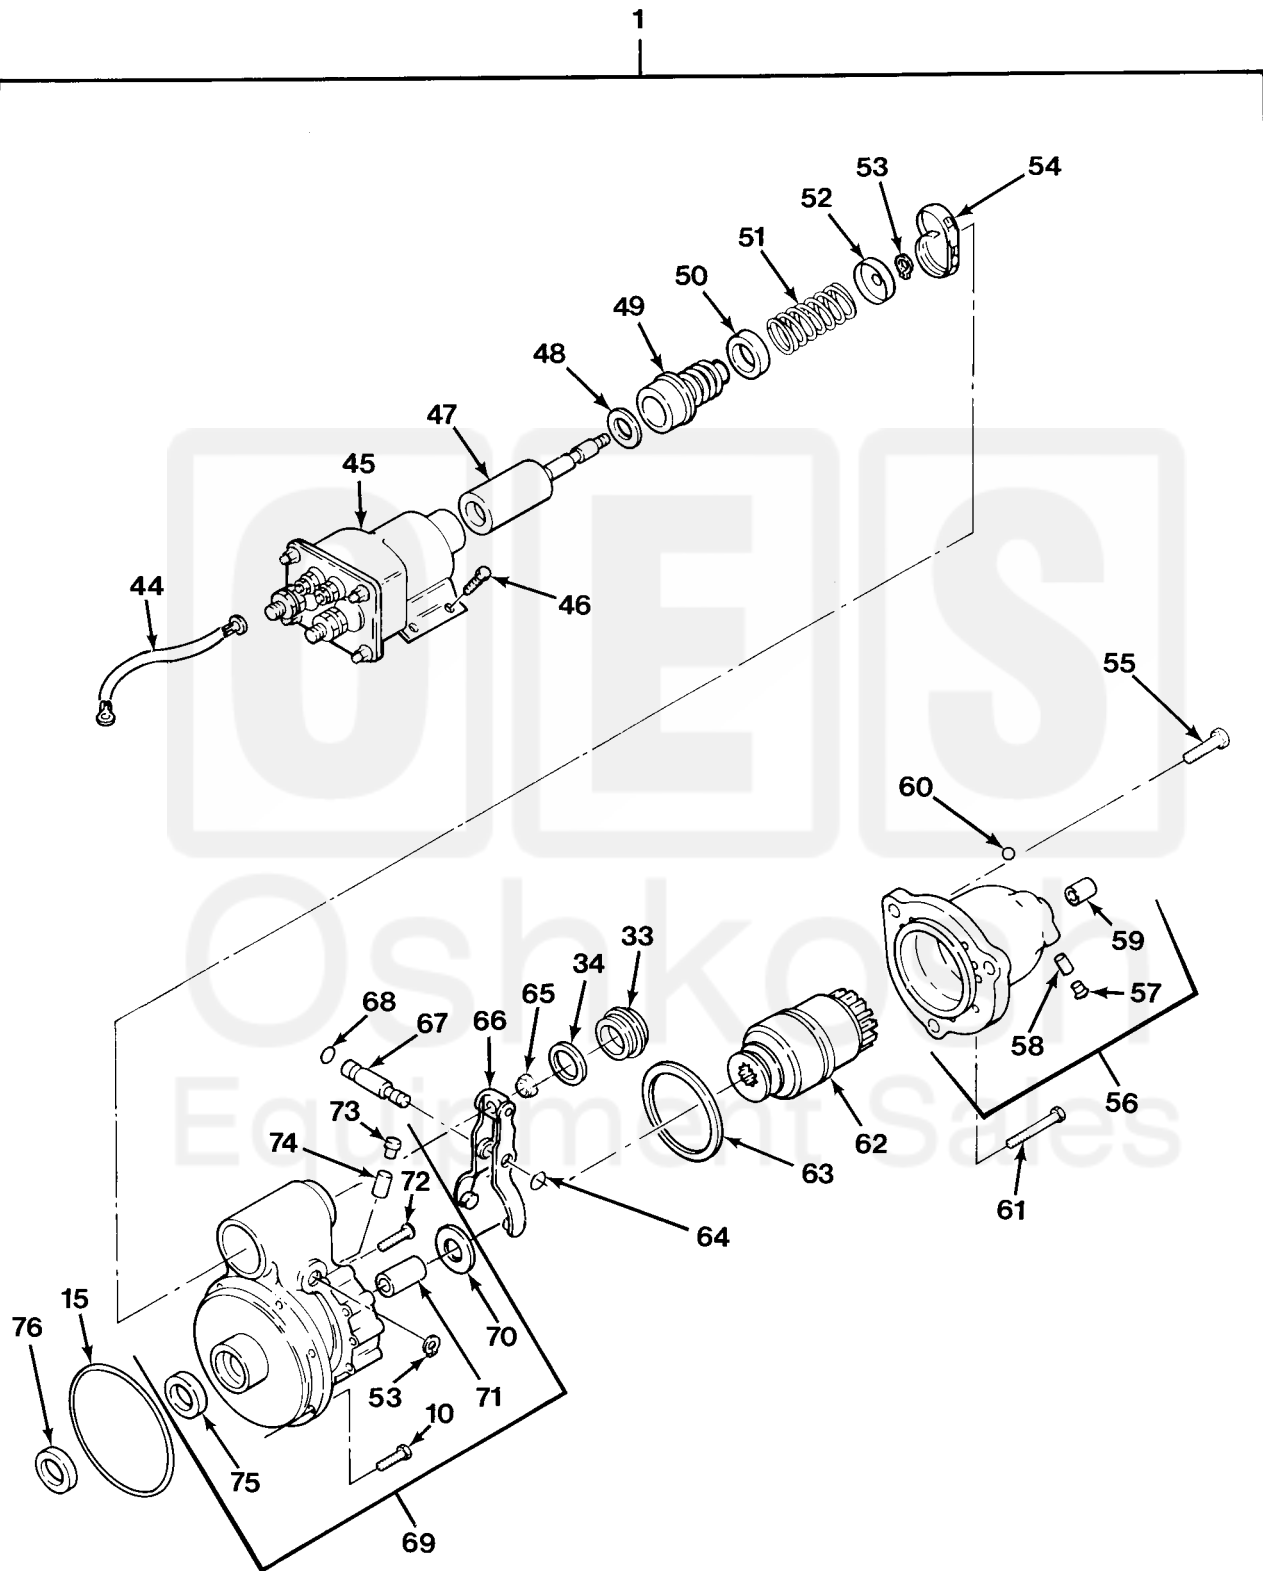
STARTER MOTOR ASSEMBLY (SHEET 2 OF 2)
